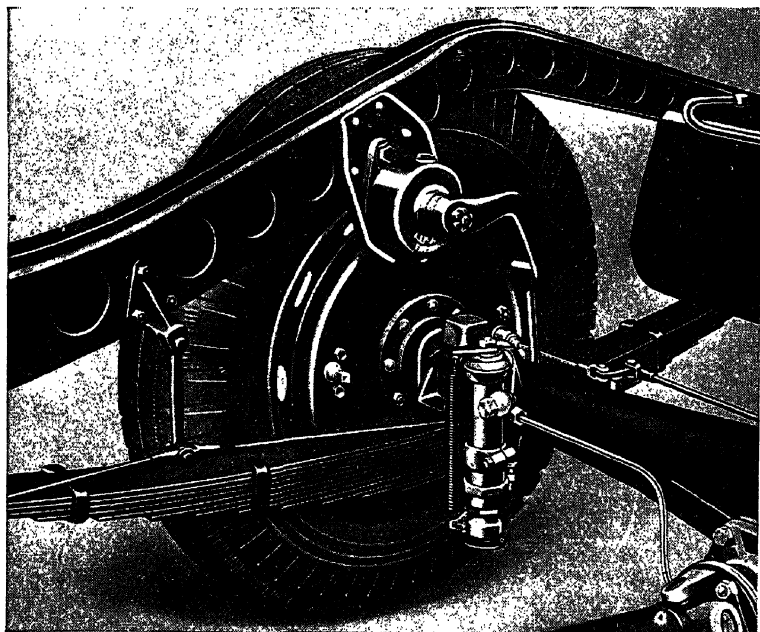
Rear End of Austin Twenty-Eight Chassis.
